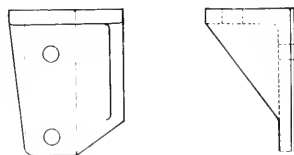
BRACKET FOR RECTANGULAR FRAME STARTING MOTOR
